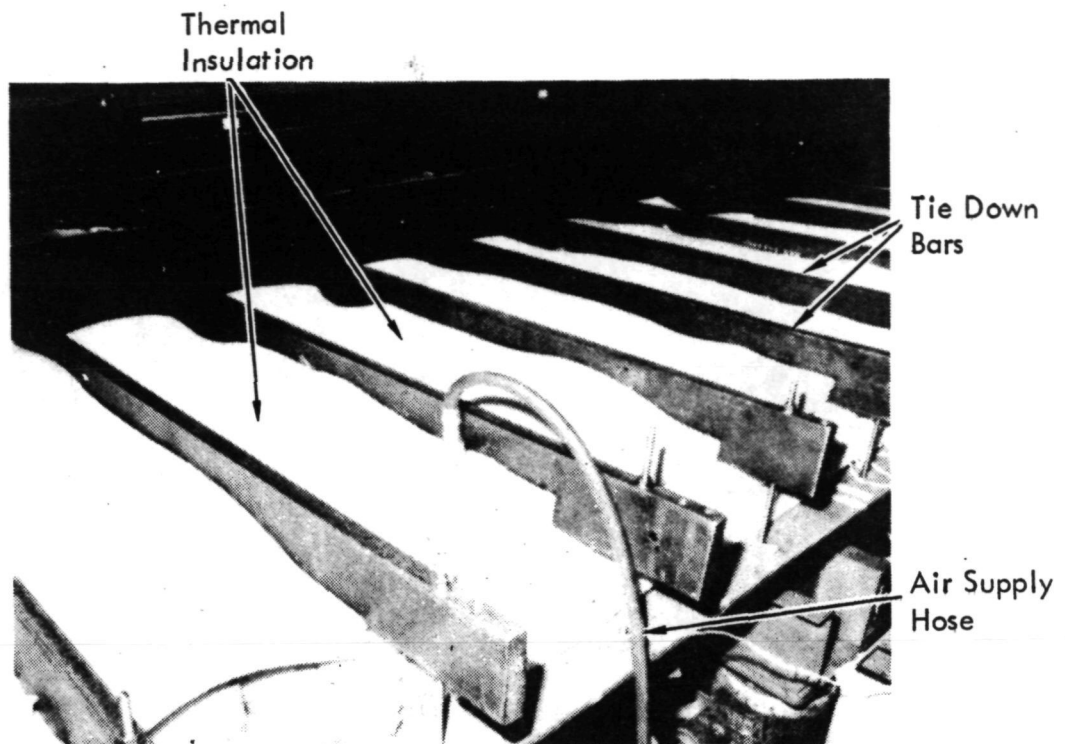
CLOSEUP OF STEEL TIE DOWN BARS IN COOL TOOL
